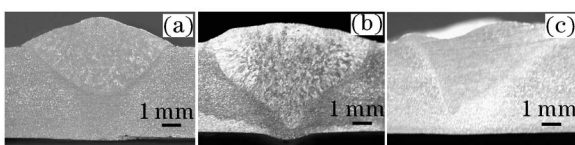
Bead cross-sections of hybrid welding at different shielding gas pressures of 0.06 (a), 0.15 (b), and 0.25 MPa (c). $P = 1200$ W, $I = 150$ A, $D_{LA} = 2.0$ mm.
